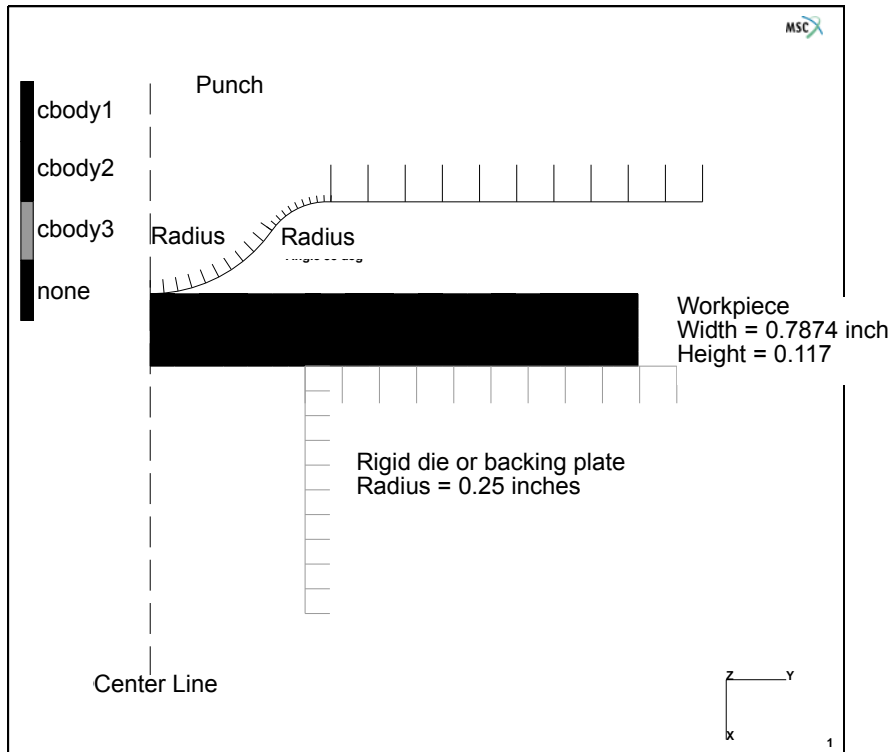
Dimensions of Punch, Workpiece, and Backing Plate
